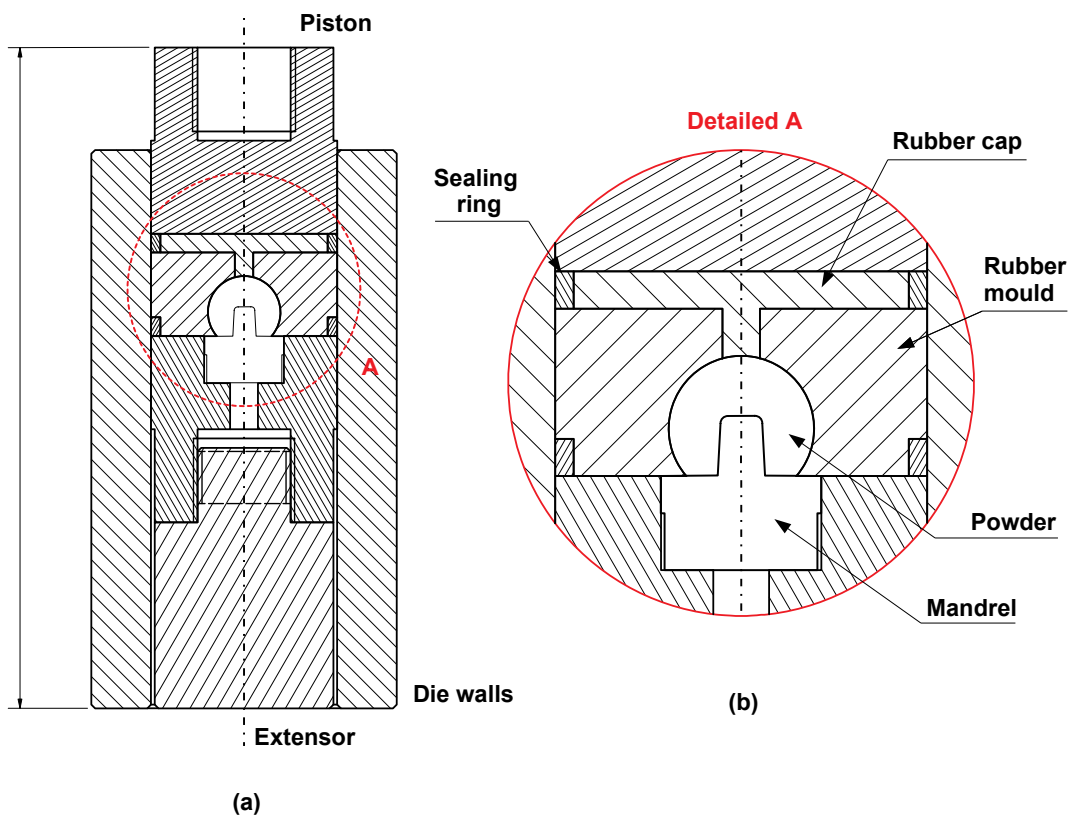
(a) Description of the tools used in Rubber Multiaxial Pressing and (b) detailed view of rubber mould.
